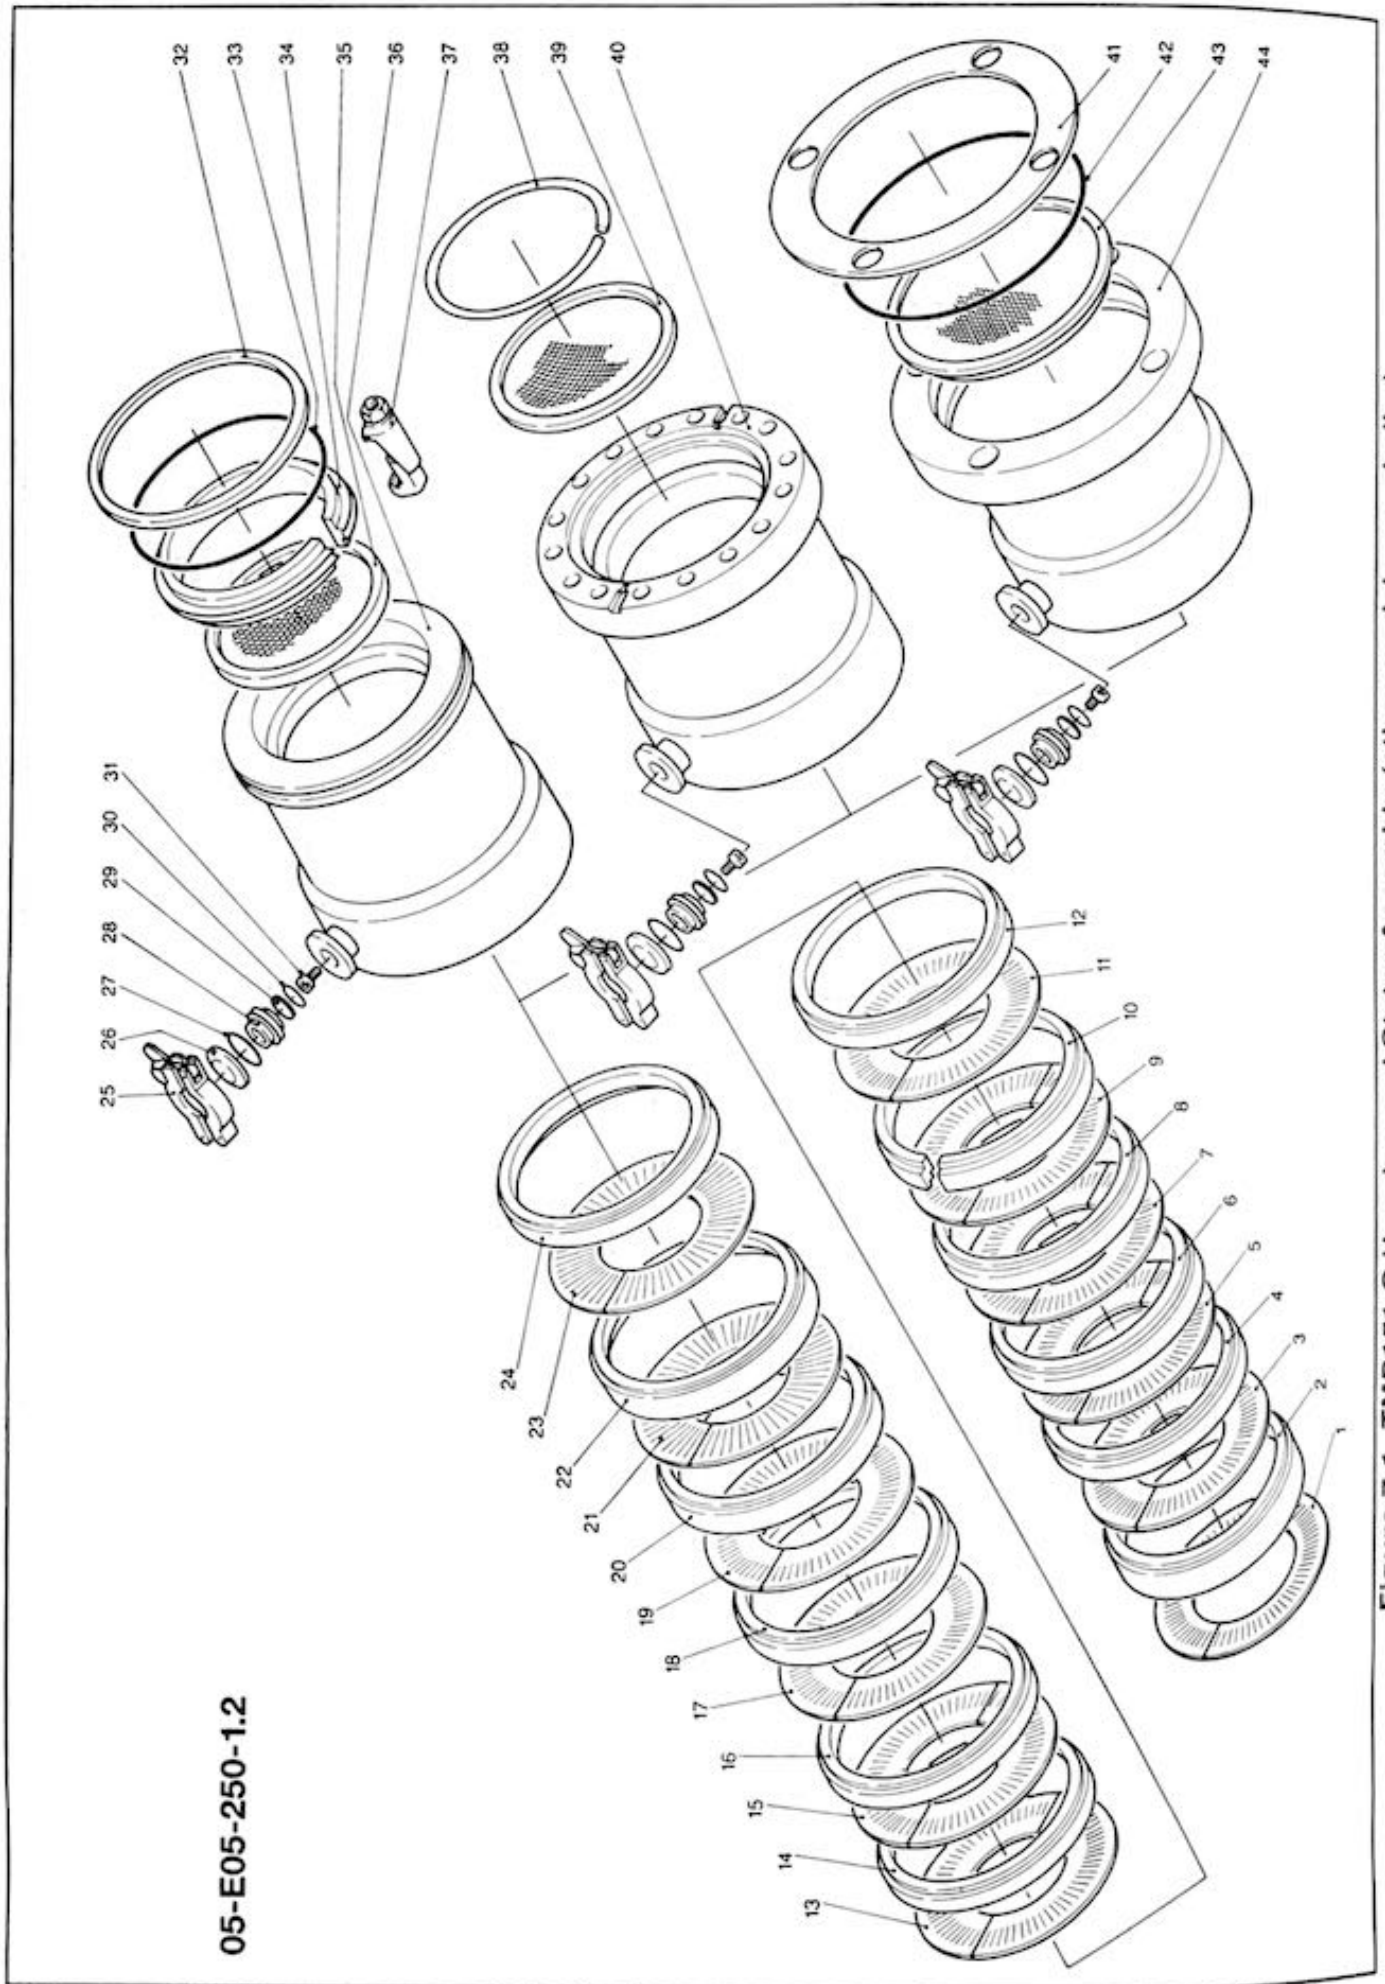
TMP151 C Housing and Stator Assembly (other models are similar)
